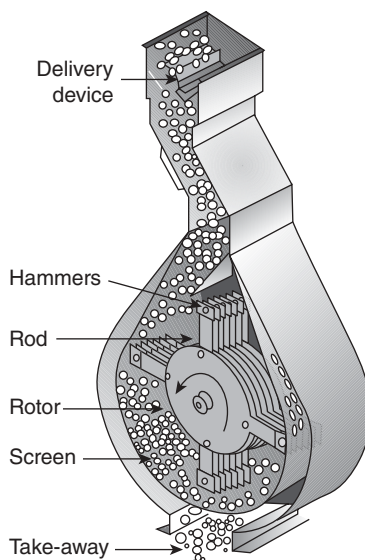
Phantom view of a hammer mill. (From www.feedmachinery.com.)
